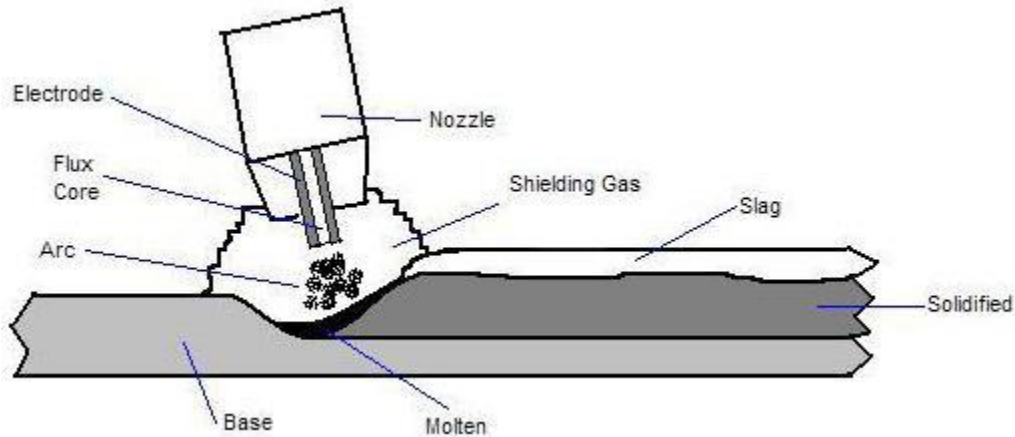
Flux Cored Arc Welding (FCAW)
